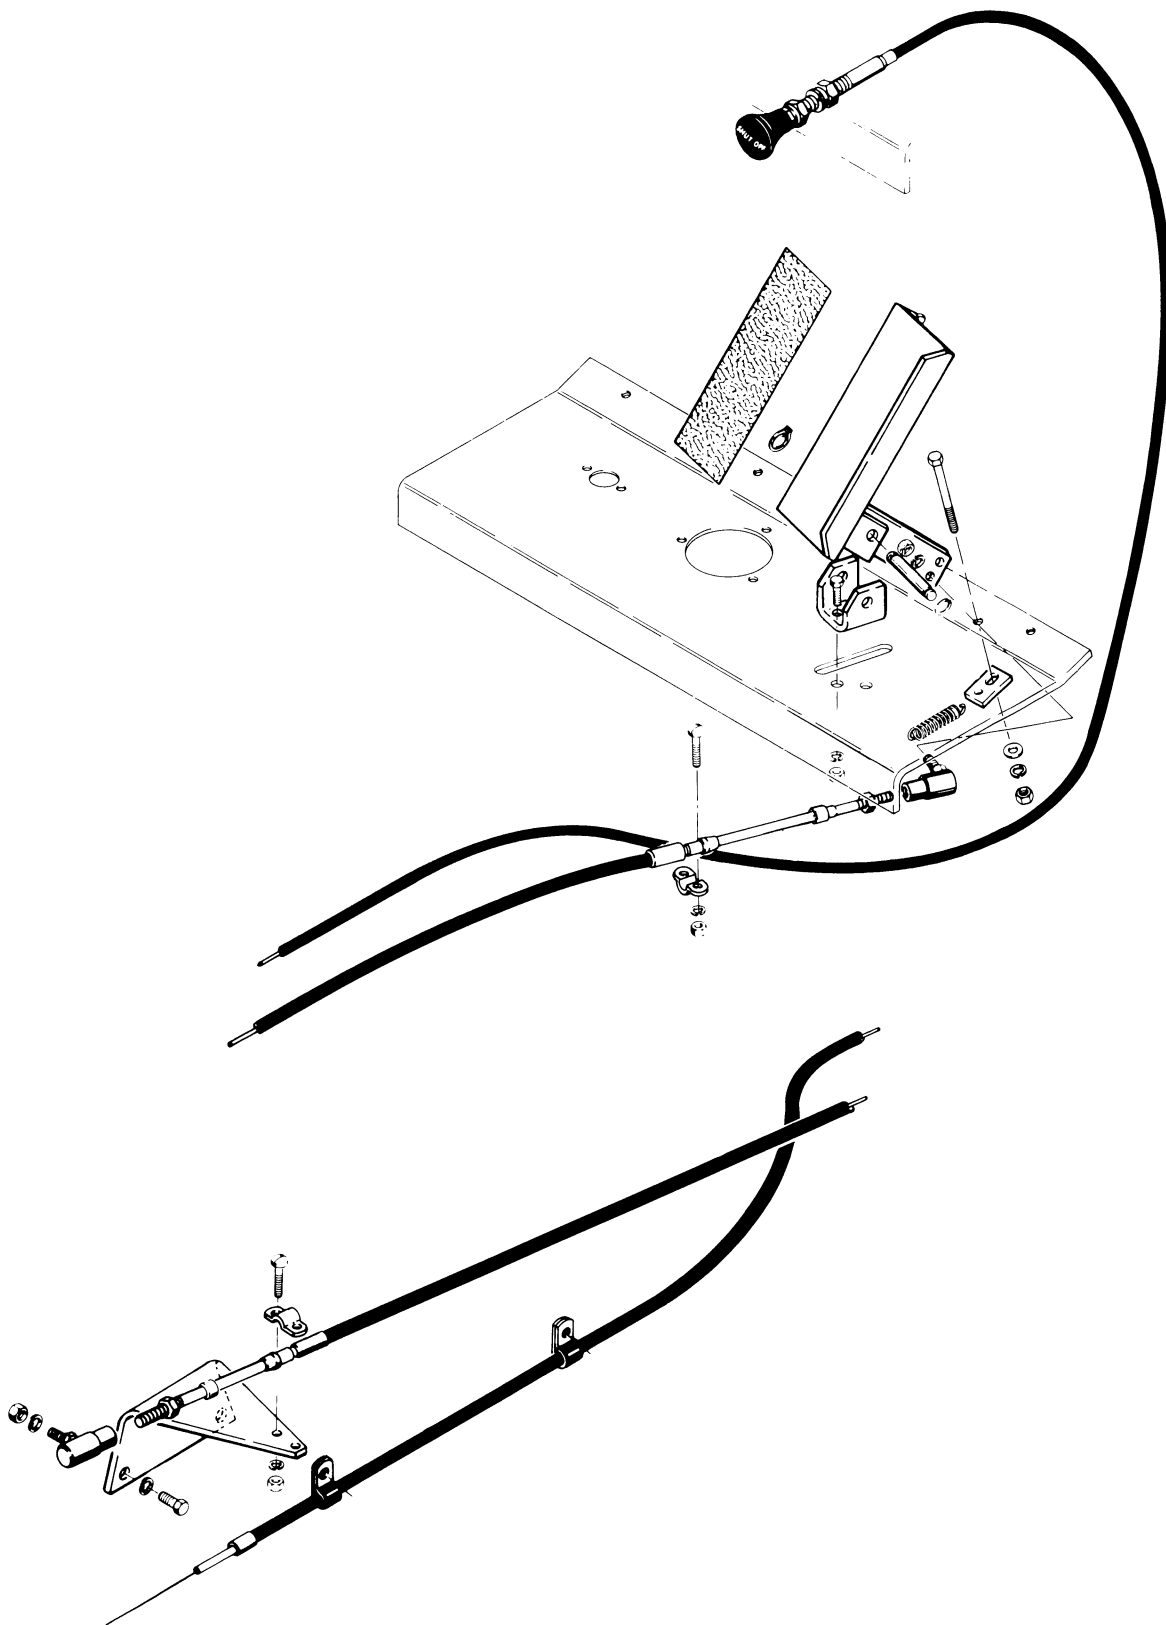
Throttle and Fuel Shutoff Cable Installation
